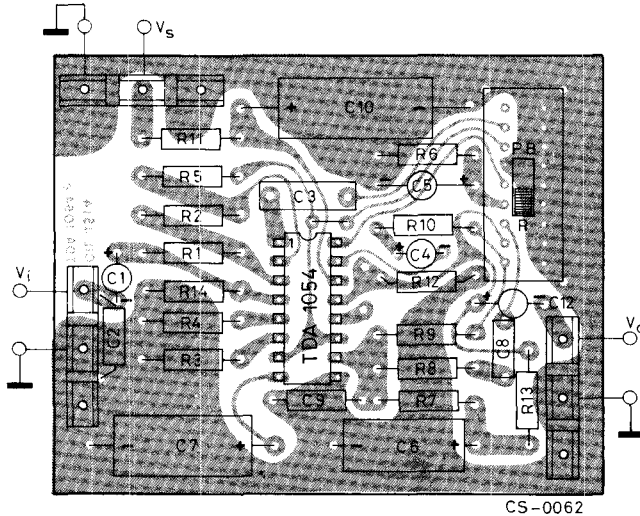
P.C. board and component layout of fig. 18 circuit (1:1 scale)
